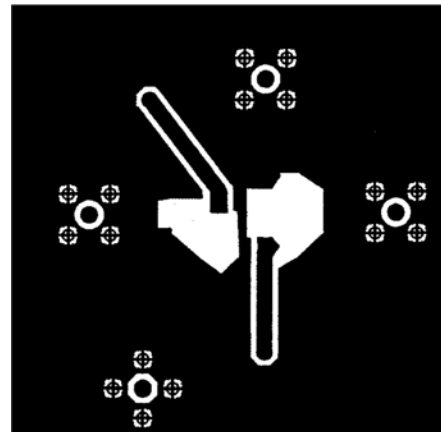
Noninverter MSOP Board Layout (Solder Side) (Looking Through the Board)
